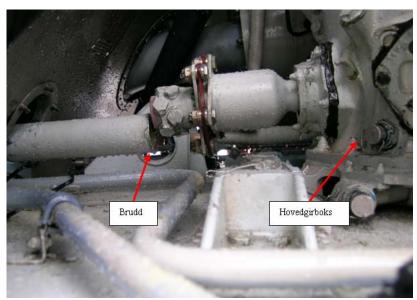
Fracture in the tail rotor drive shaft.
